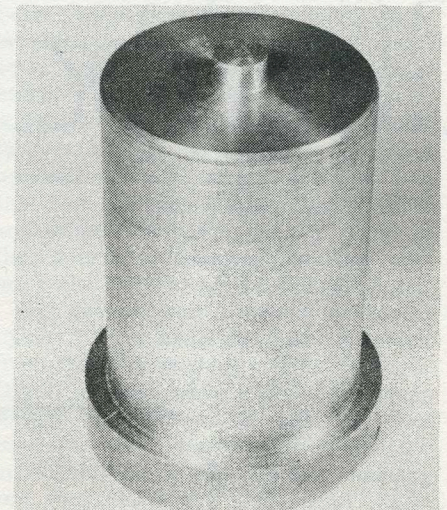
Crankshaft centering tool fits the bore and the stub indicates location of crank journal. Proper alignment is important!
